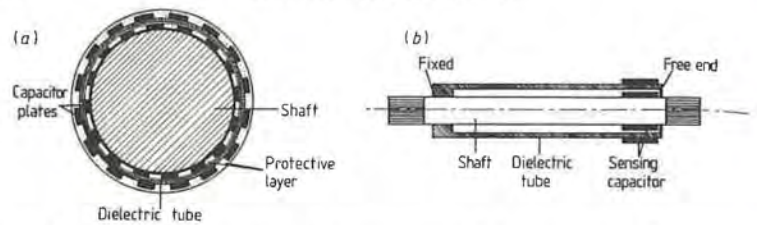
Construction of torque sensor: (a) cross section through shaft and sensor; (b) longitudinal section.
